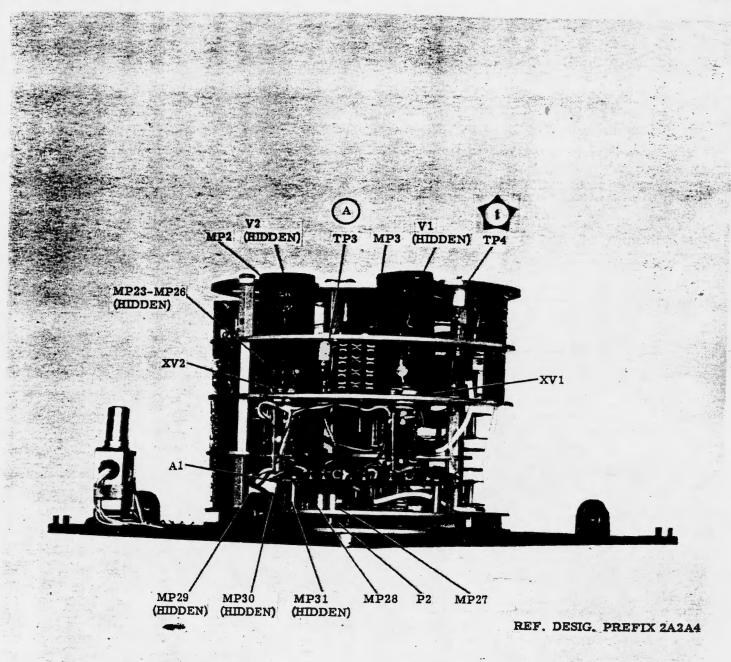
RF Amplifier Electronic Assembly, Turret Removed, Front and Left Side, Component and Test Point Location
